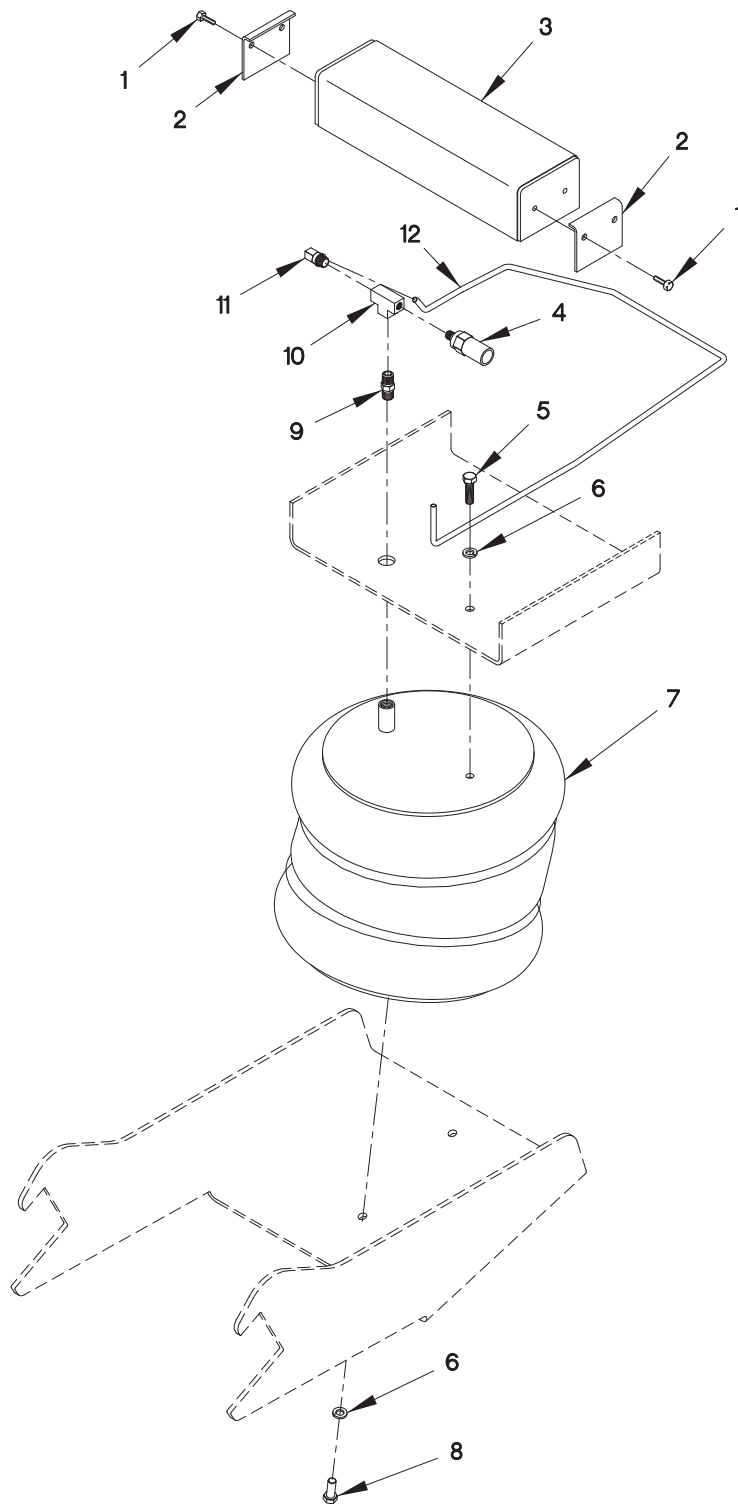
Group 1208 BRAKE PROTECTION VALVE TUBES & FITTINGS.
